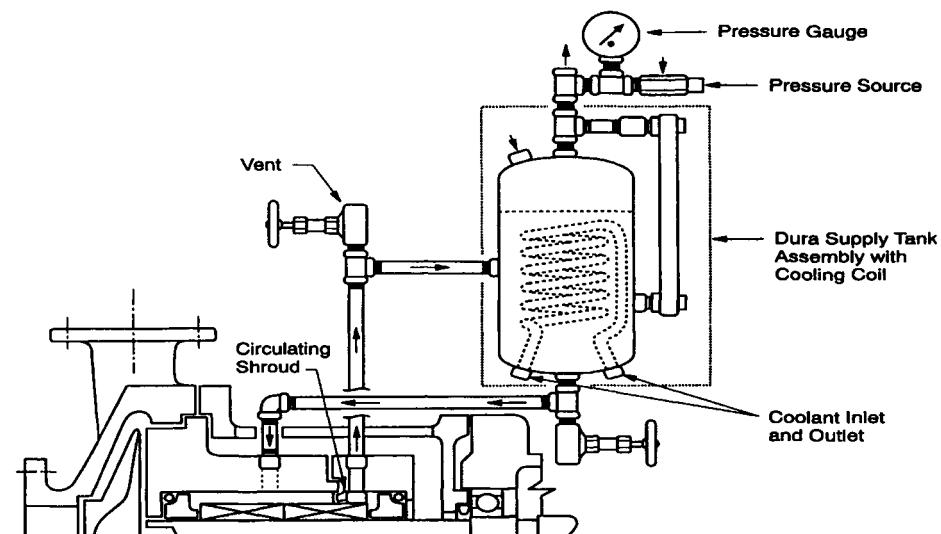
Double inside seal with induced circulation through supply tank with cooling coil (Courtesy of Durametallic Corporation)
